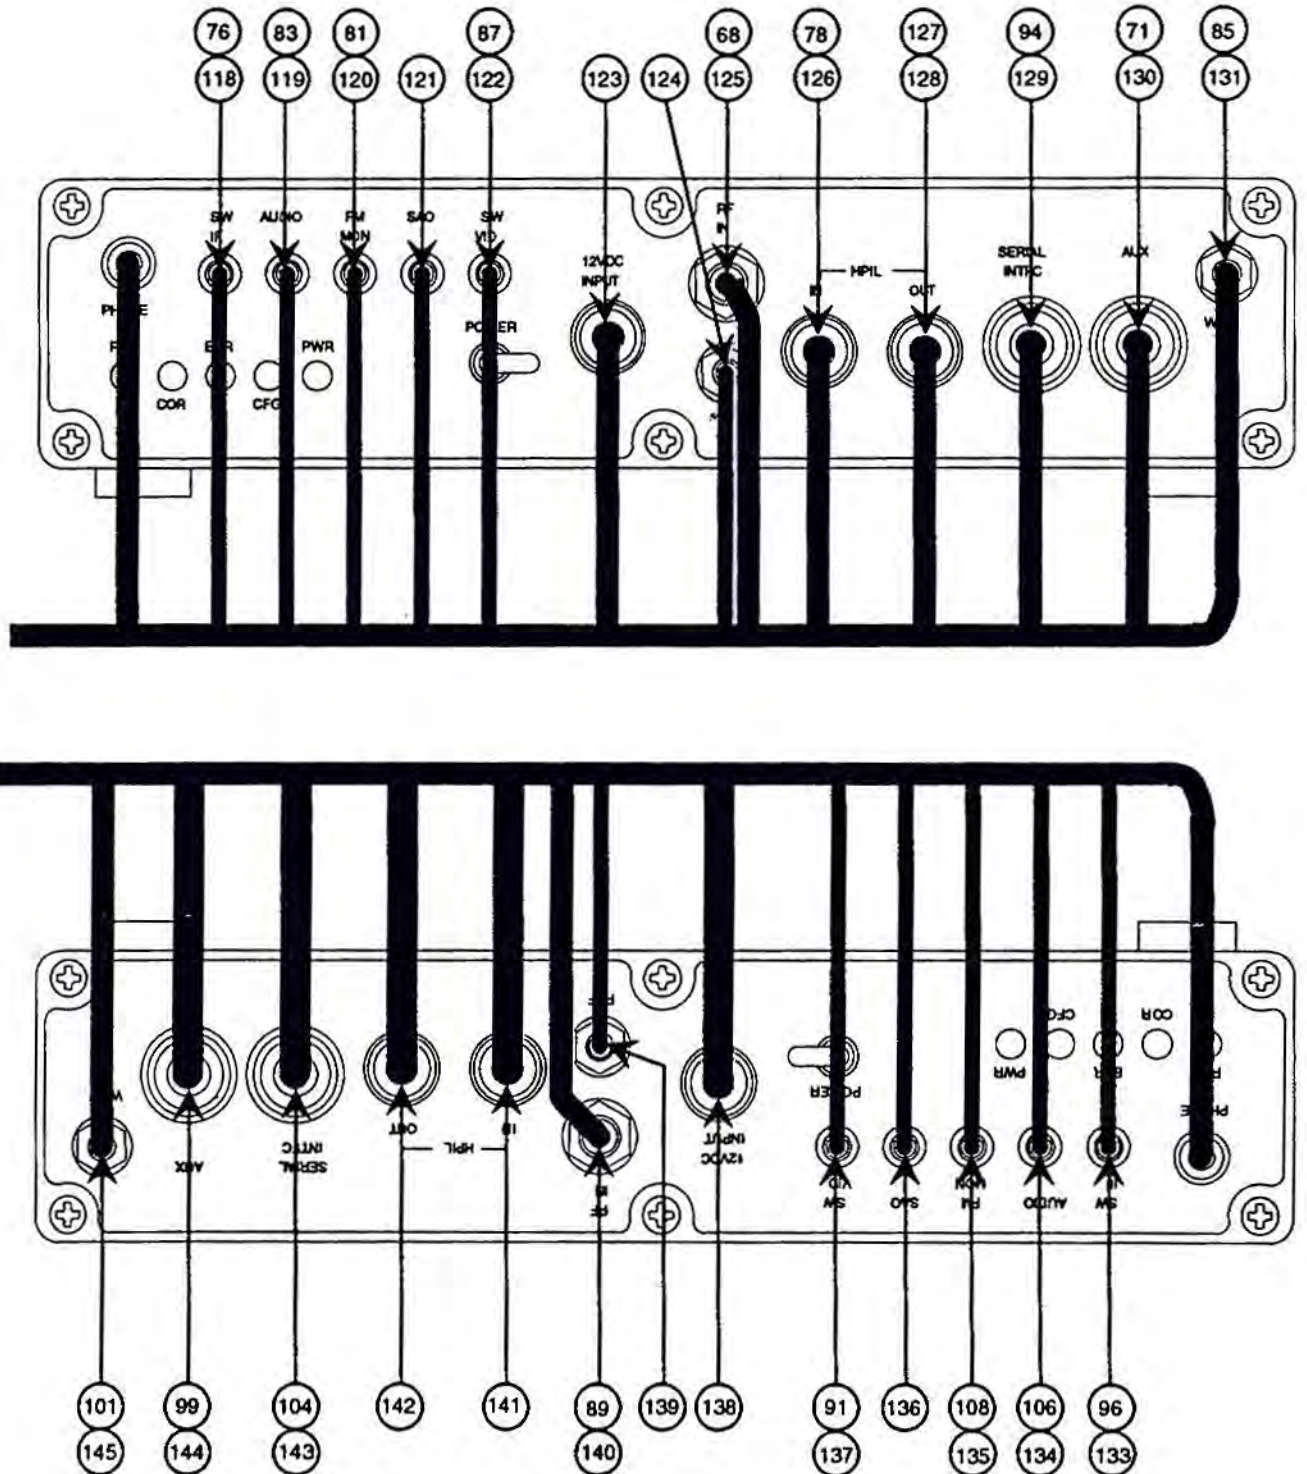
WJ-9902-2 Receiver Controller Assembly Parts Location
